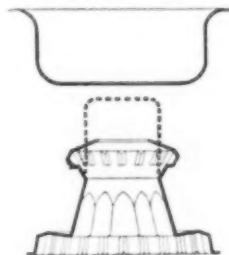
PRESSED-STEEL WIRE-WHEEL HUB FORMED FROM BLANK 16 1/2 IN. IN DIAMETER AND 3/32 IN. THICK
